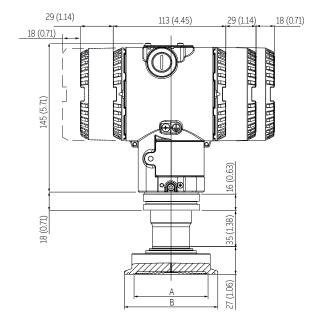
266DRH with barrel housing and direct mount seal S26SS Union Nut (For dimensions of S26 seals refer to the S26 datasheet) Figure 23 266HRH / 266NRH with barrel housing and direct mount seal S26SS Union Nut (For dimensions of S26 seals refer to the S26 datasheet)
